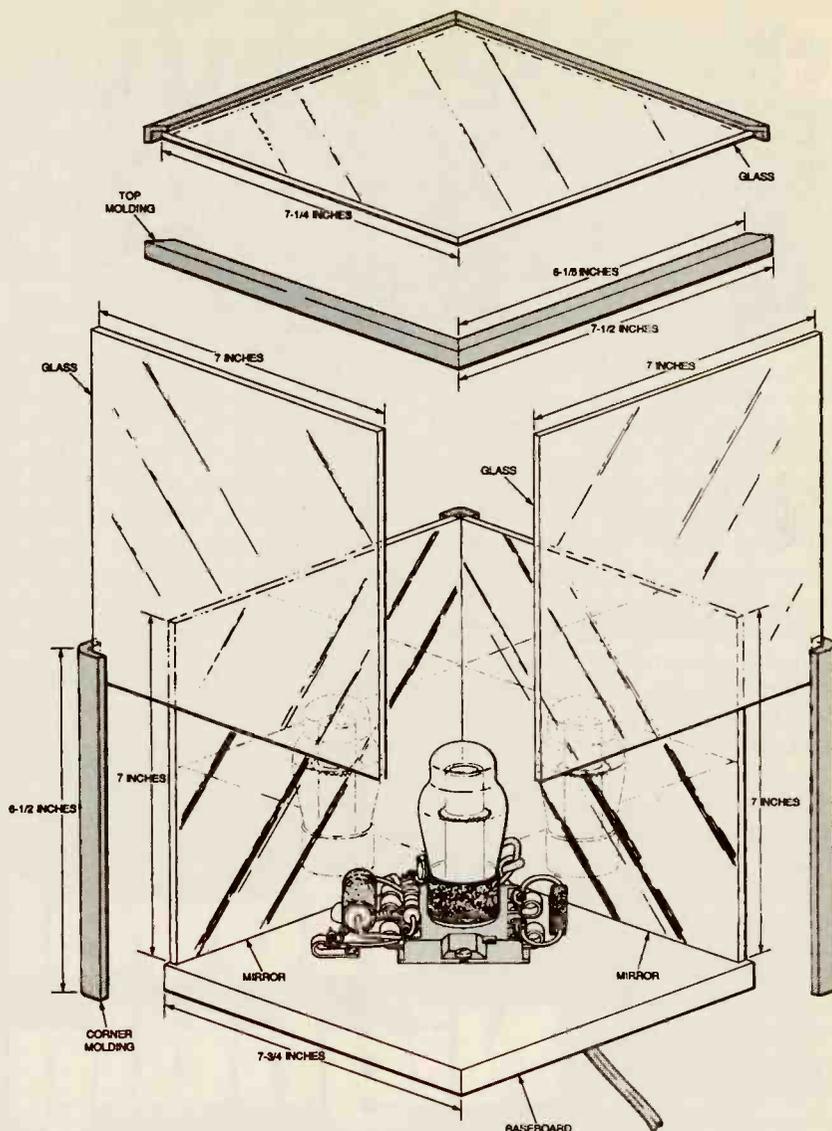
Here is an exploded view of the nightlight-case assembly. The molding strips hold the pieces of glass and the mirrors together once they are glued. Note the 45° angles on the top molding which allow for a tight fit.
